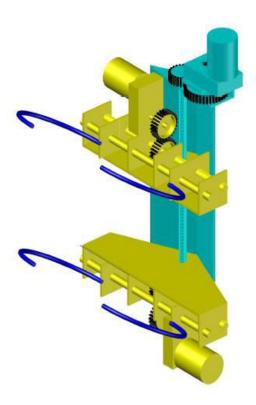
Three dimensional view of climbing unit with gripping units
